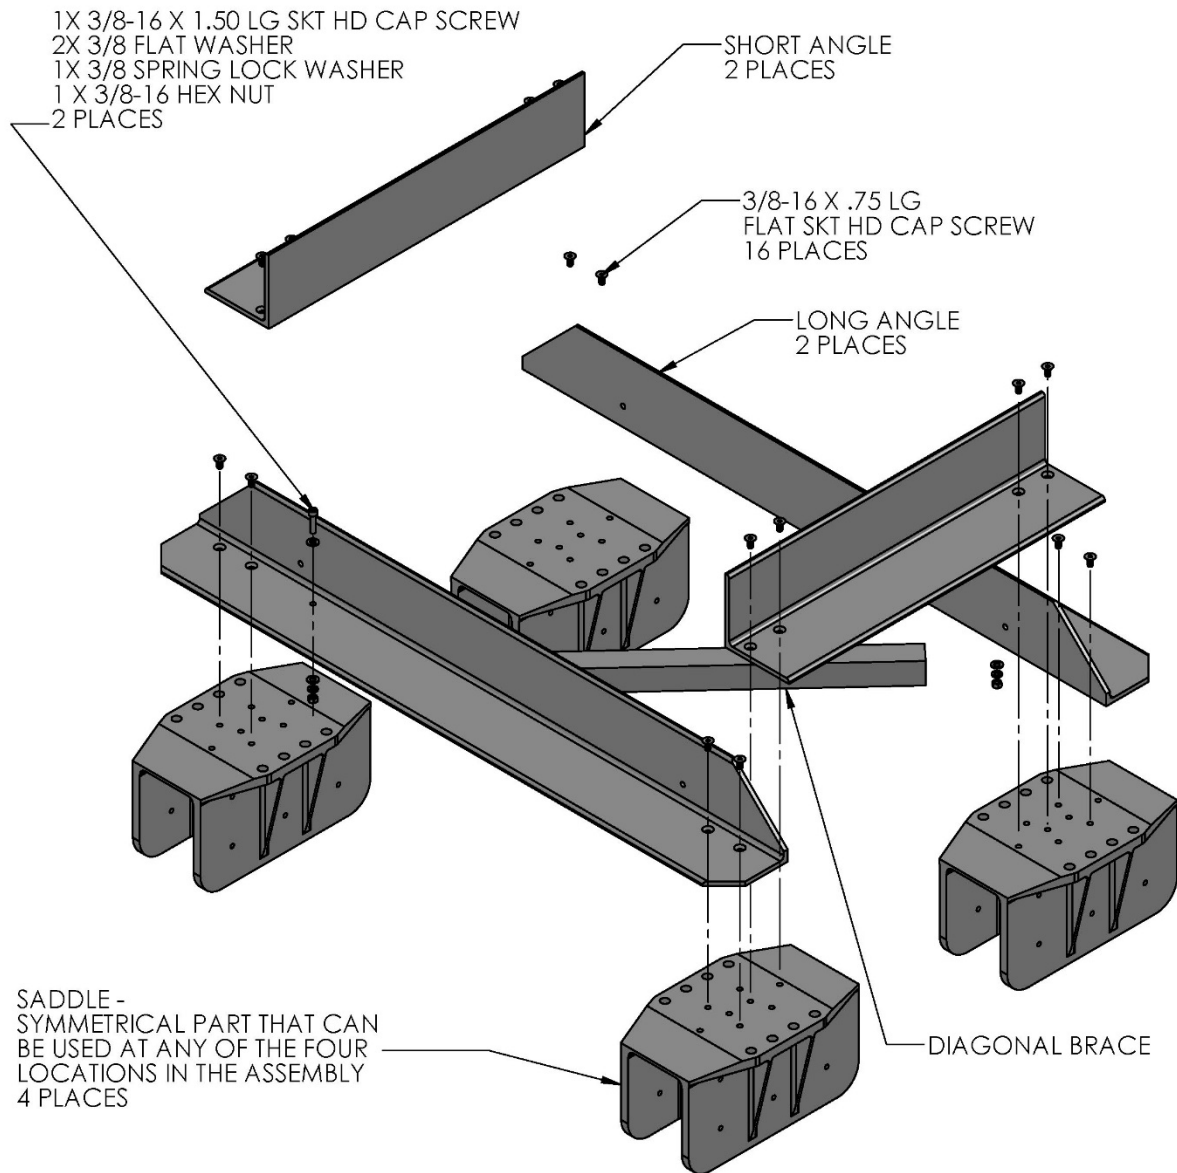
EXPLODED VIEW OF SADDLE INSTALLATION FIXTURE
